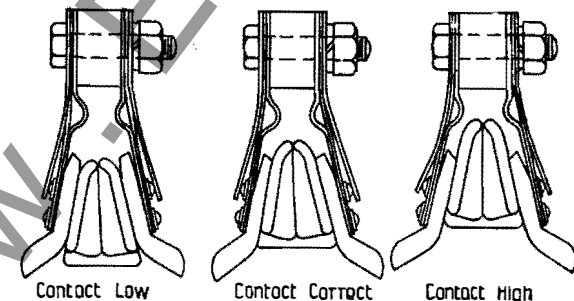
CONTACT ADJUSTMENT FOR TYPE F-11 OIL CIRCUIT-BREAKER
